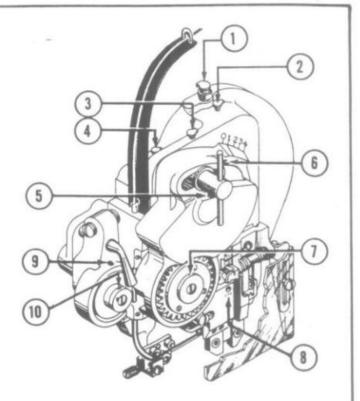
Wire Feed Brake Tension and Wire Guide Adjustments (Long Draw Heads)
